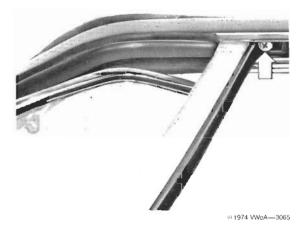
Phillips head screw that holds top of door front guide channel. Rear channel must be pulled out for access to this screw.
